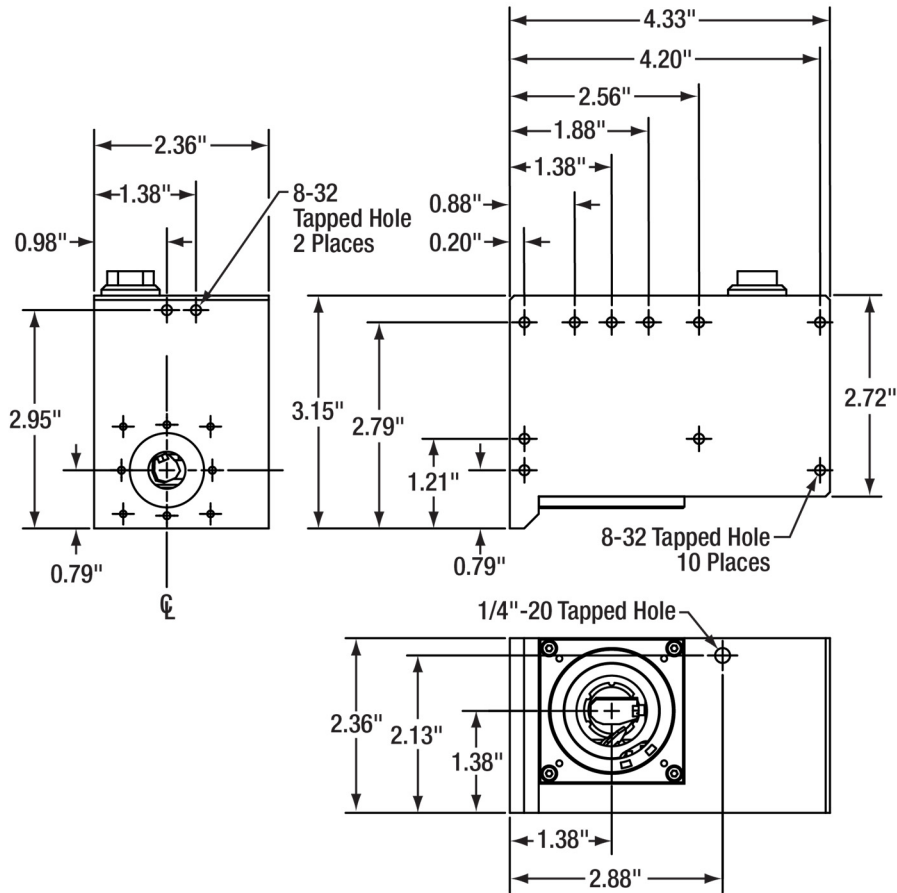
Drawing of Threaded Holes in an Imperial OCTP Scan Cube Module
